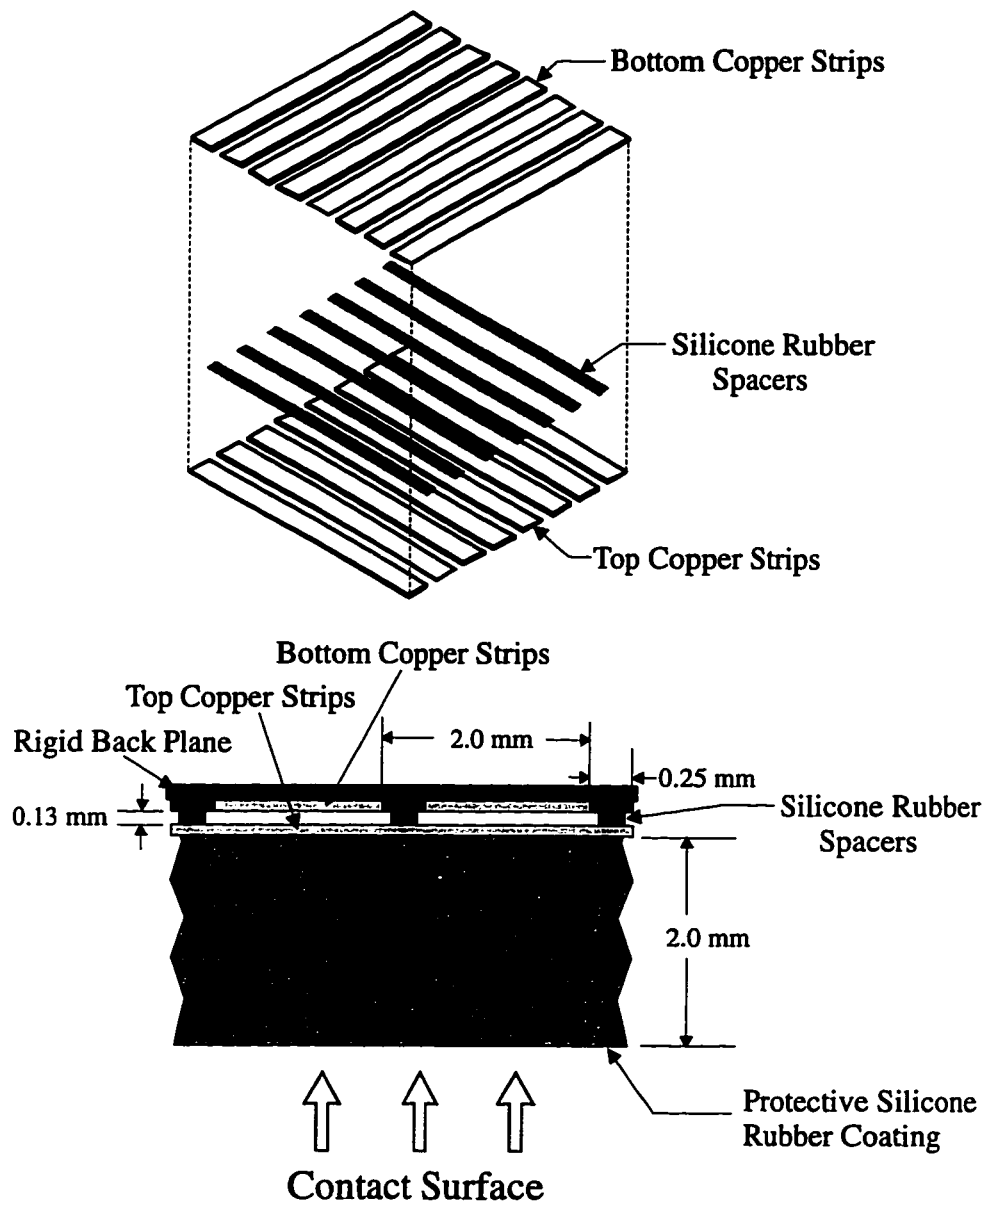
Tactile array sensor. Top: exploded view showing sensor construction. Bottom: side view showing the crossed layers of copper strips separated by silicone rubber spacers. A protective rubber coating is added on the contact surface.
